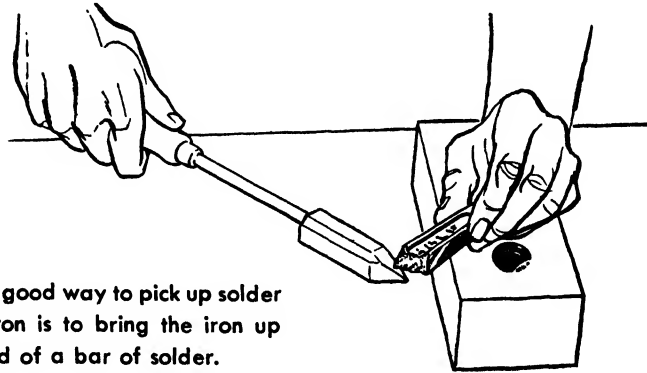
A good way to pick up solder with a hot iron is to bring the iron up under the end of a bar of solder.
